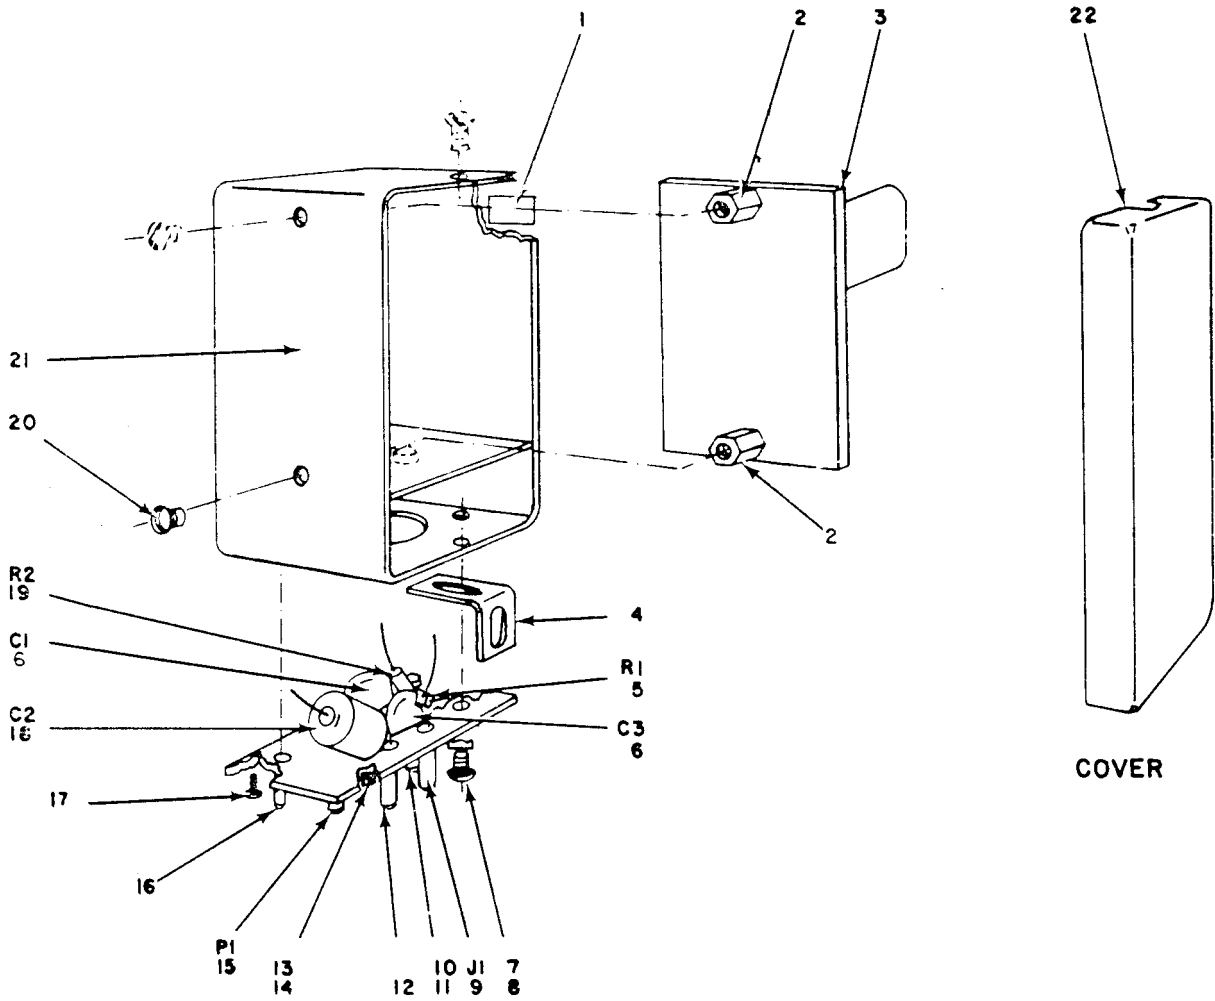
Circuit Board Assembly (A1A1) (Sheet 1 of 2),
